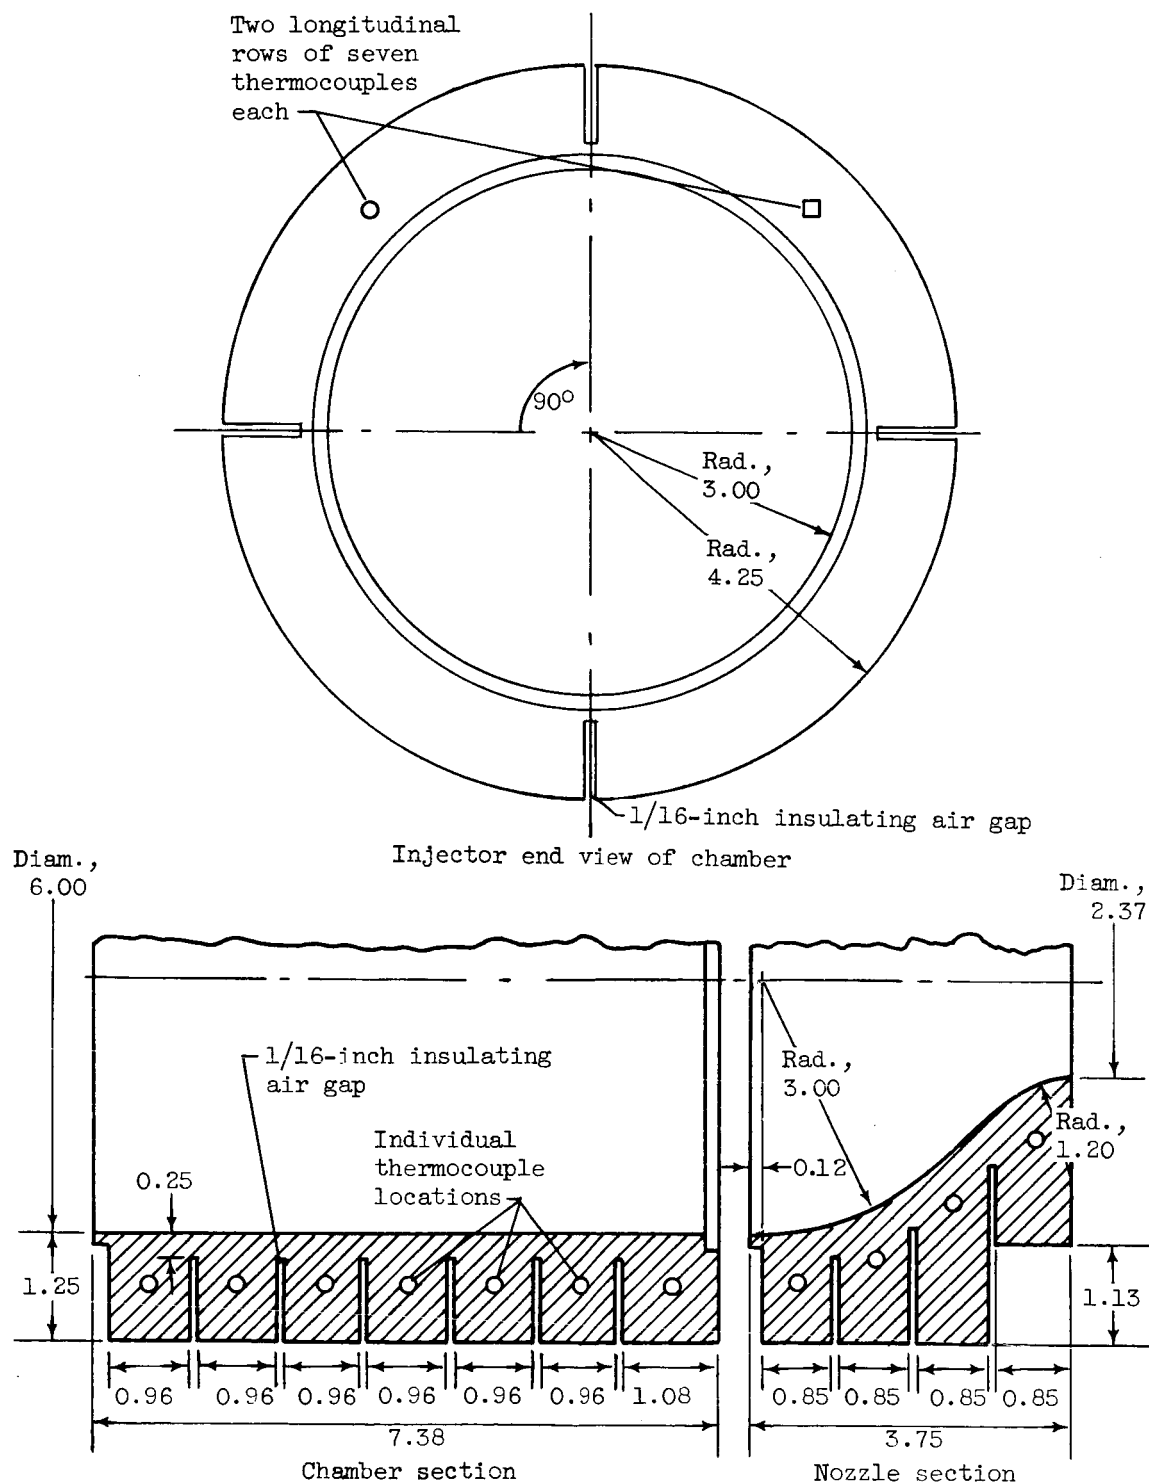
Schematic drawing of solid-copper segmented engine showing thermocouple locations (dimensions in inches).
